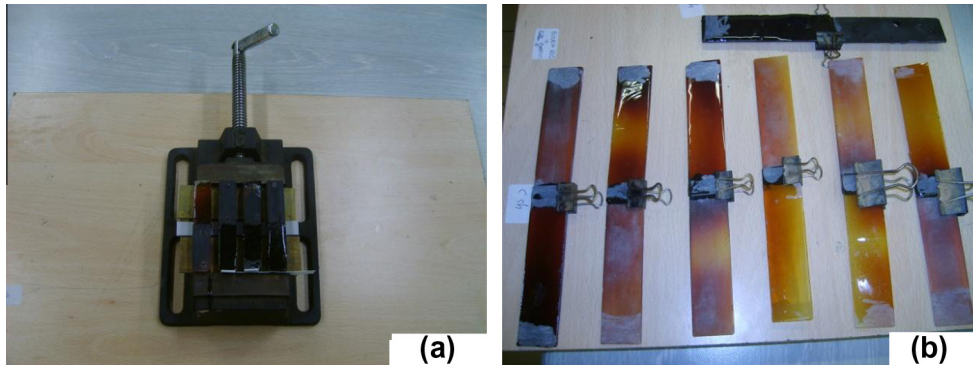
(a) Assembly of the tensile butt joint specimens under uniform compression (before curing) and (b) assembly of the single lap joint shear specimens under uniform compression (before curing).
